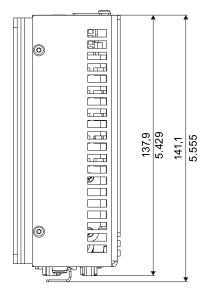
Dimensional drawing of the device with mounting brackets Side view
